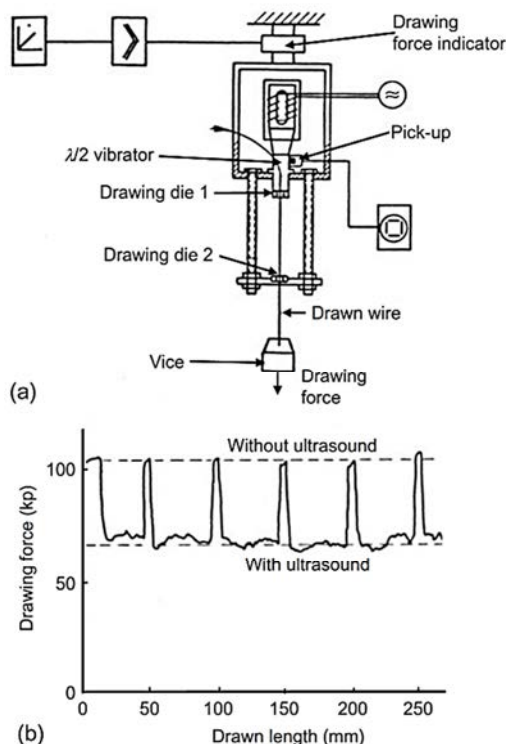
Wire drawing work. a- Experimental wire drawing setup and b- draw force on copper wire with on-off ultrasound [28]
